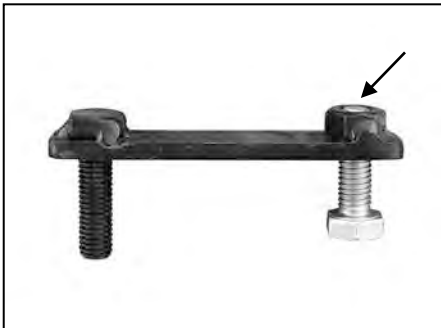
2009-mid 2015 Driver/Left front mounting location (No factory holes in pinch weld 2009-2011 models)
